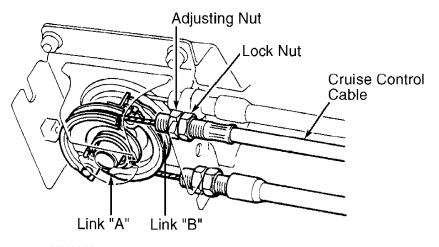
Adjusting Cruise Control & Accelerator Cables (1991 - 4 Of 4) Courtesy of Mitsubishi Motor Co.
